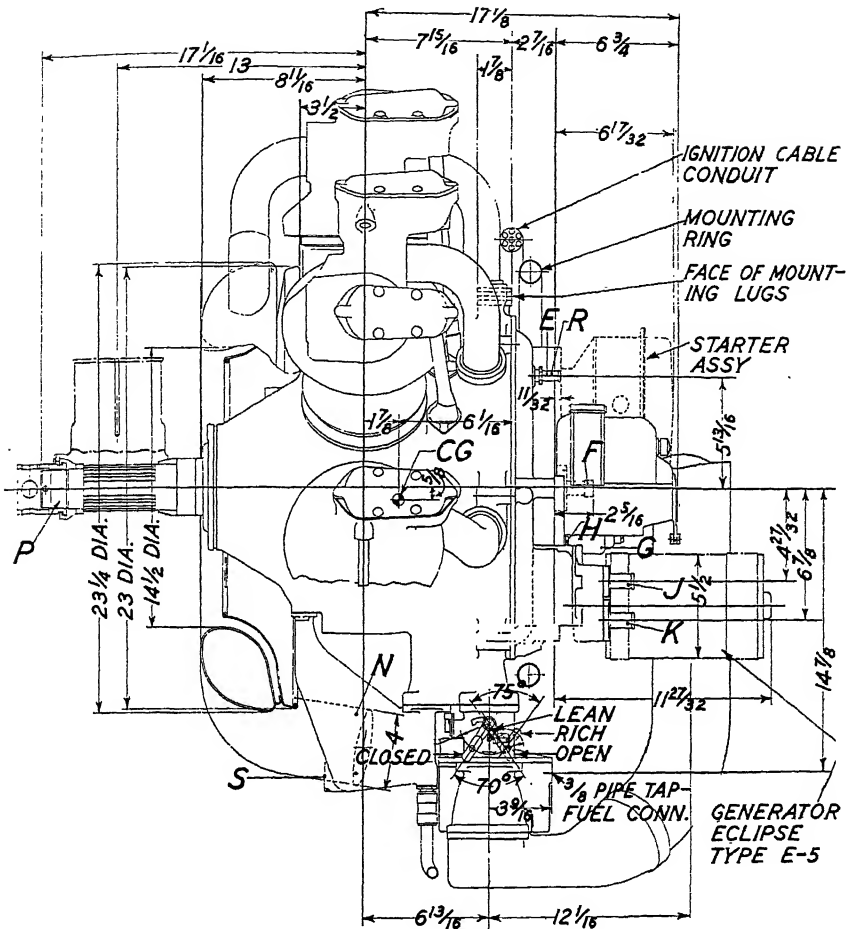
SIDE VIEW OF CONTINENTAL "W670" ENGINE
